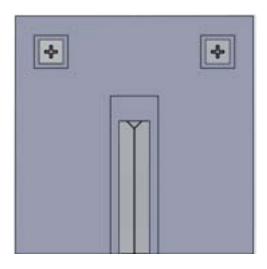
Shows the packaging design with a through wafer process allowing vision of the capping chip through the device chip which makes alignment easier during assembly. The fibre can also be inserted after chip assembly.
